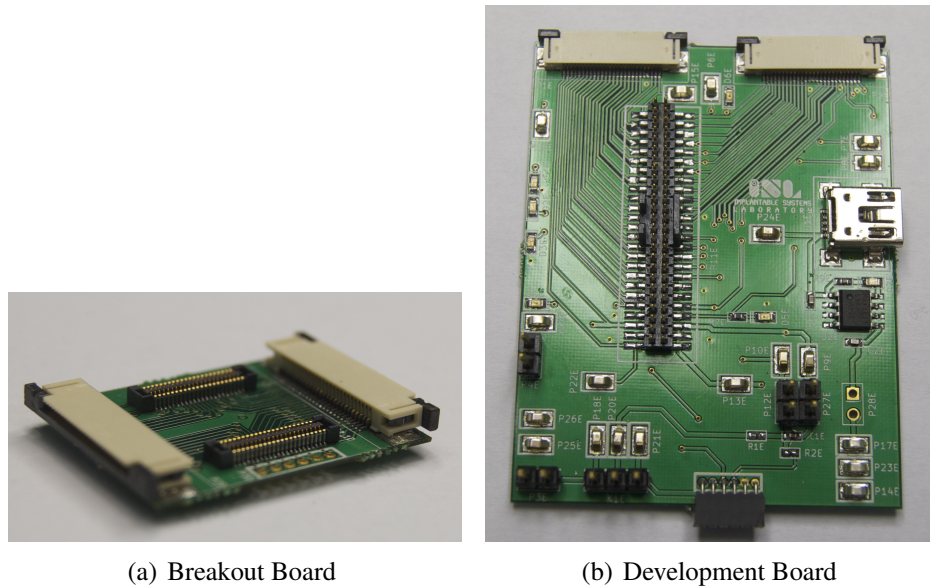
(a) Breakout board and (b) Development boards of the second physical prototype.
